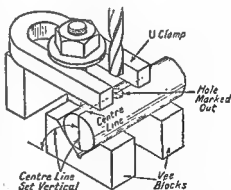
Setting and Clamping for Drilling a Shaft.
